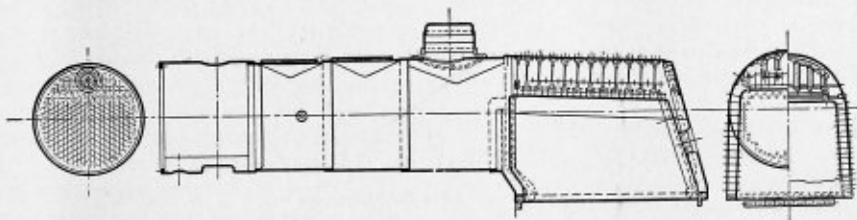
EXTENDED WAGON-TOP LOCOMOTIVE BOILER.
